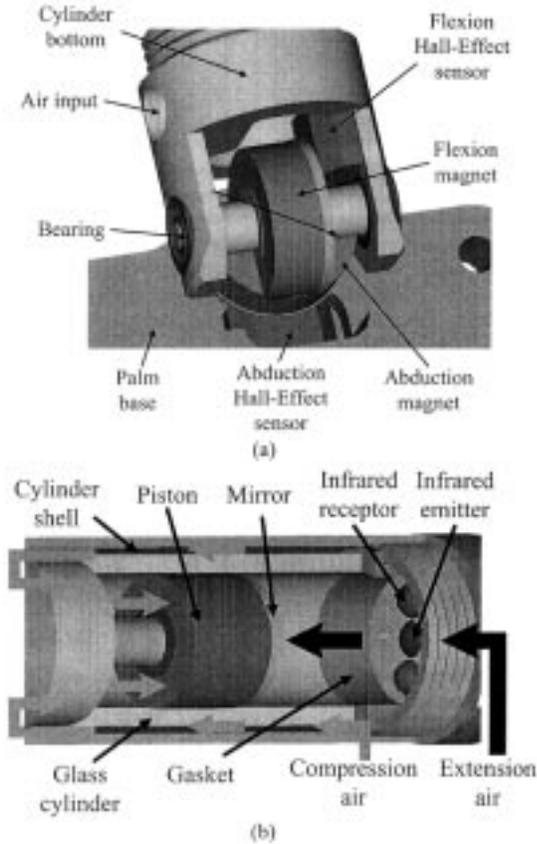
Open view of the RMII-ND actuator construction. (a) Sensorized spherical joint. (b) Section through the cylinder. © Rutgers University CAIP Center. Reprinted by permission.
